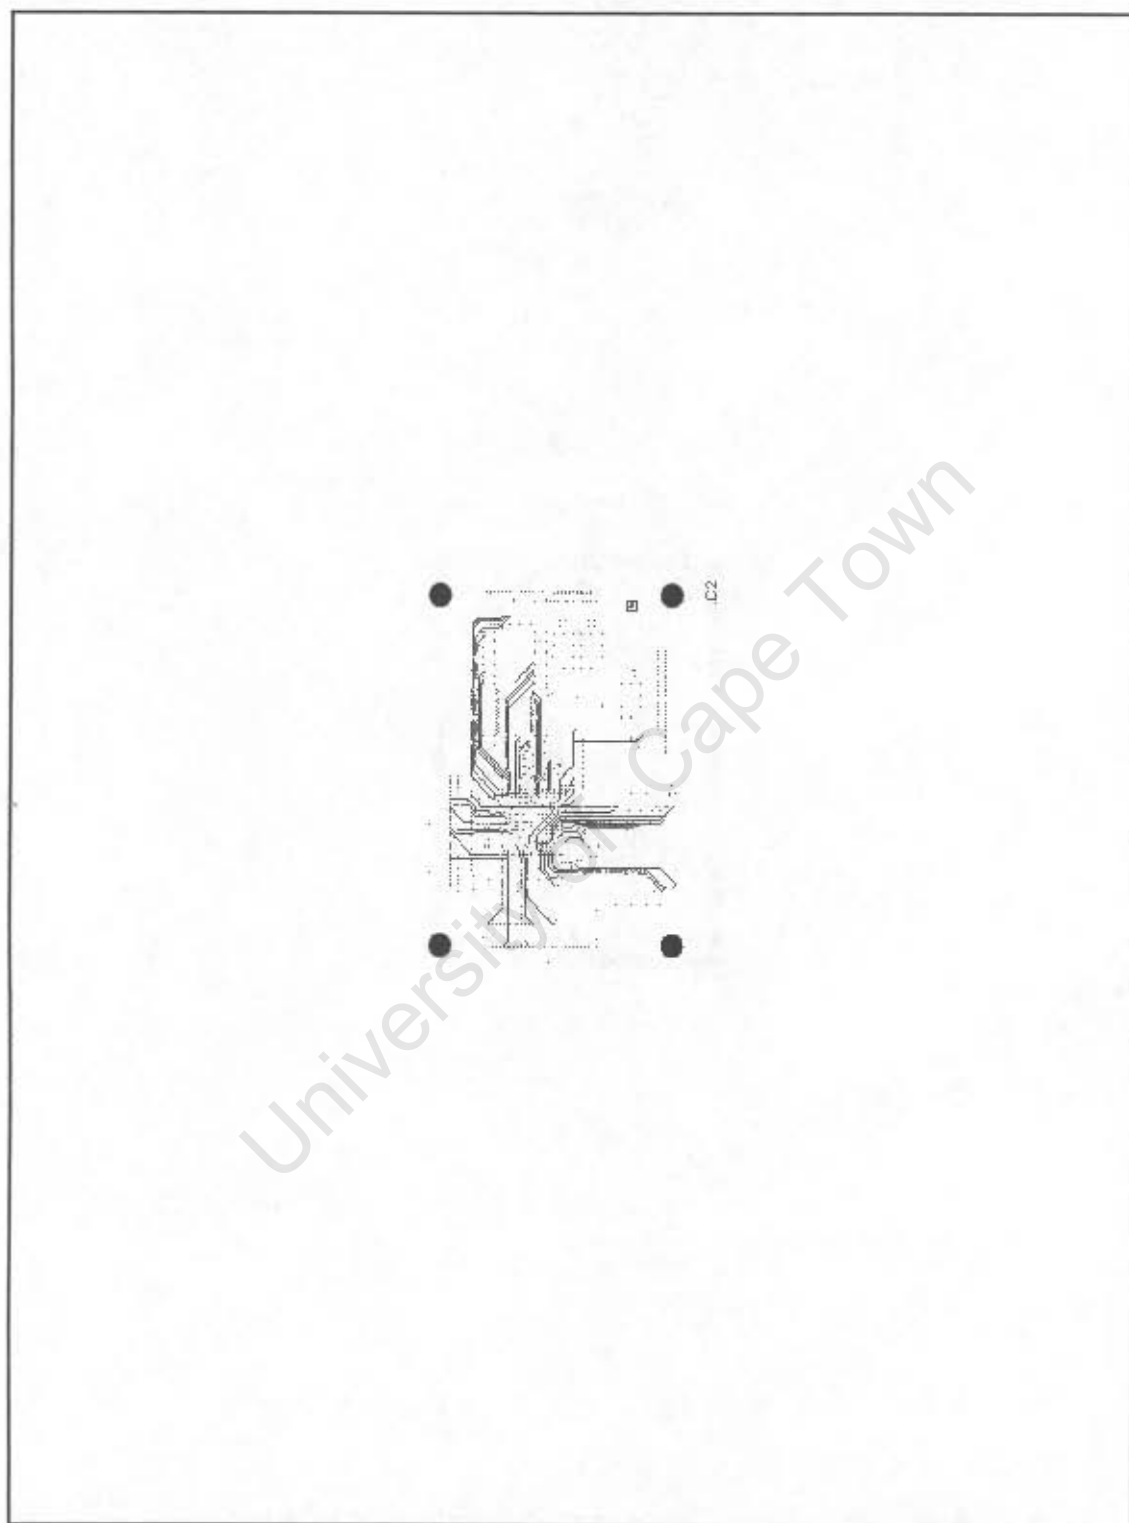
RUI Module PCB Layout - Internal Signal Layer 2
